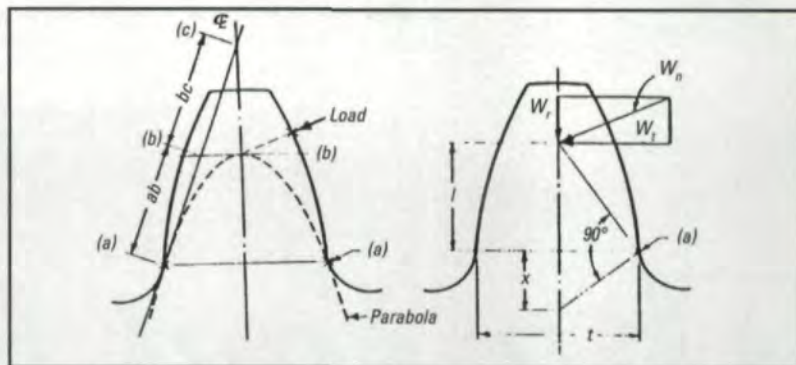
Inscribed parabola on gear tooth section. Courtesy of Technomic Publishing (Ref. 1).
